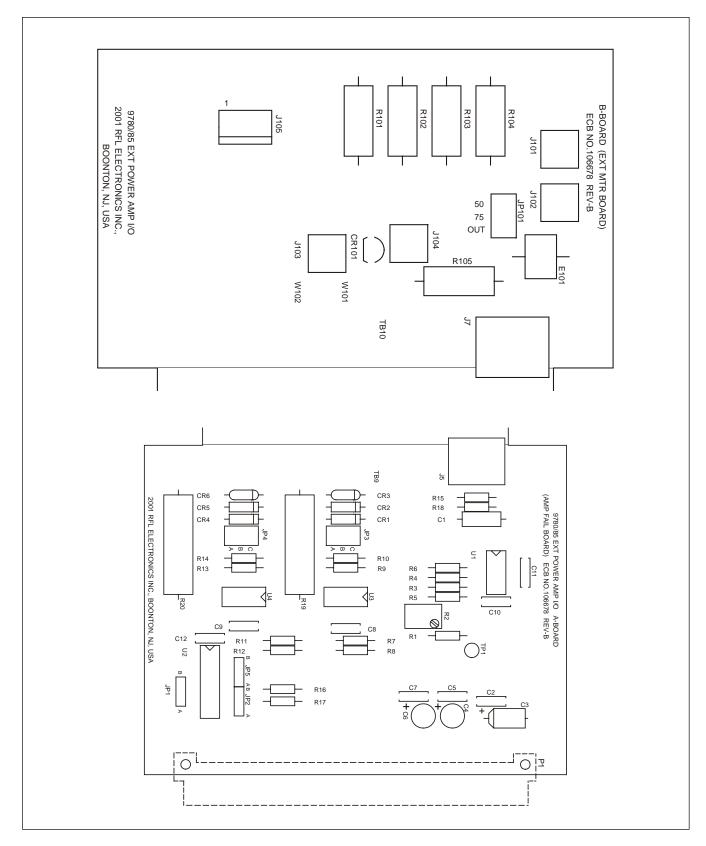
Component locator drawing, External Power Amp I/O module (Assy No. 106675)
